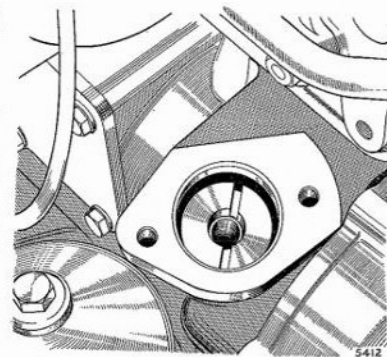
Correct location of the offset slot in the distributor driving shaft after fitting, with the engine set at T.D.C. and firing on number 1 cylinder
